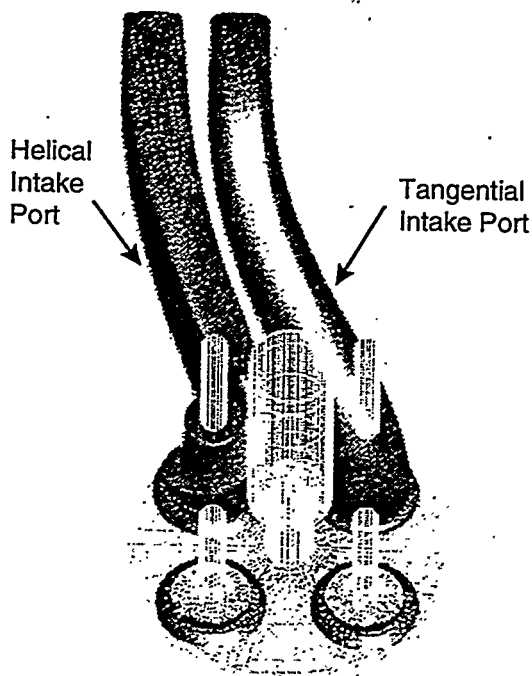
Intake Port Arrangement for the Single-Cylinder Test Engine.
